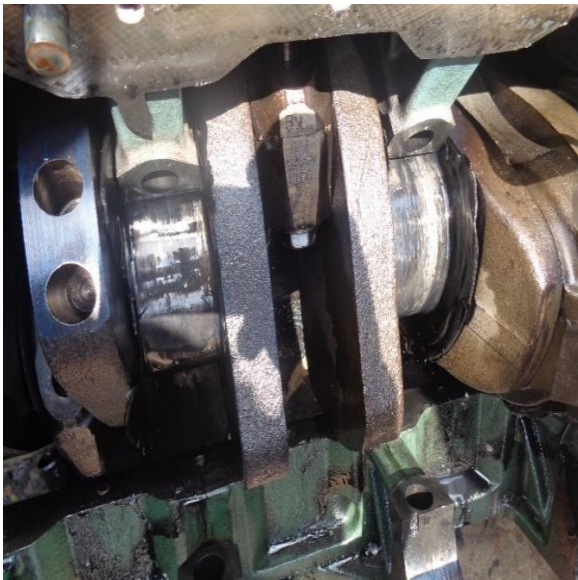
Engine crank shaft with shall bearing melted and damage
